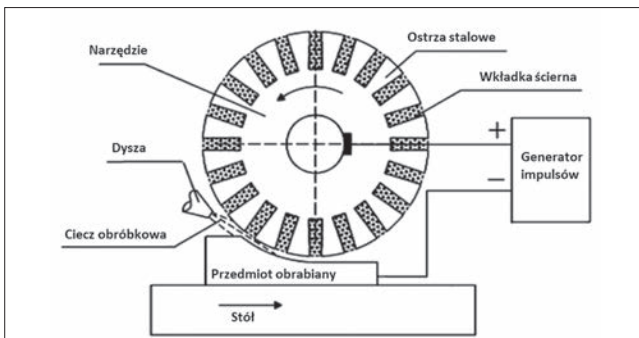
Electrodischarge abrasive machining of ceramic elements (e.g. SiC) with a special segment electrode (a tool) [14]
